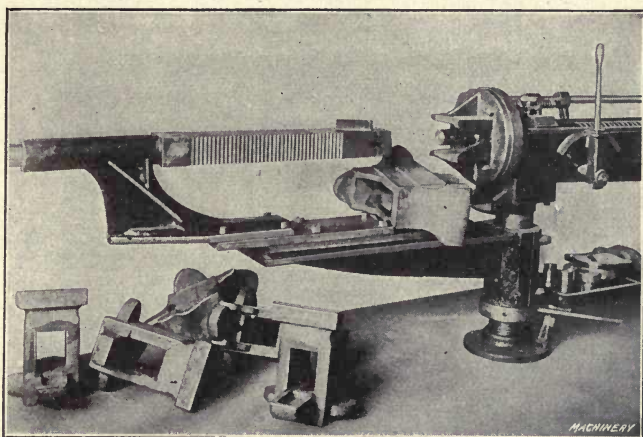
Showing Heavy Broach supported on Bracket ready for placing Work in Position
